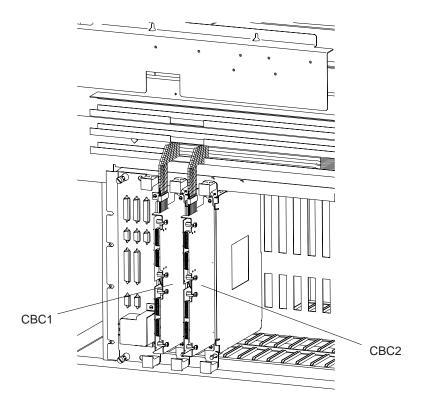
Two CBC Configuration (Coupler Side, 3746-900 Rear View)
